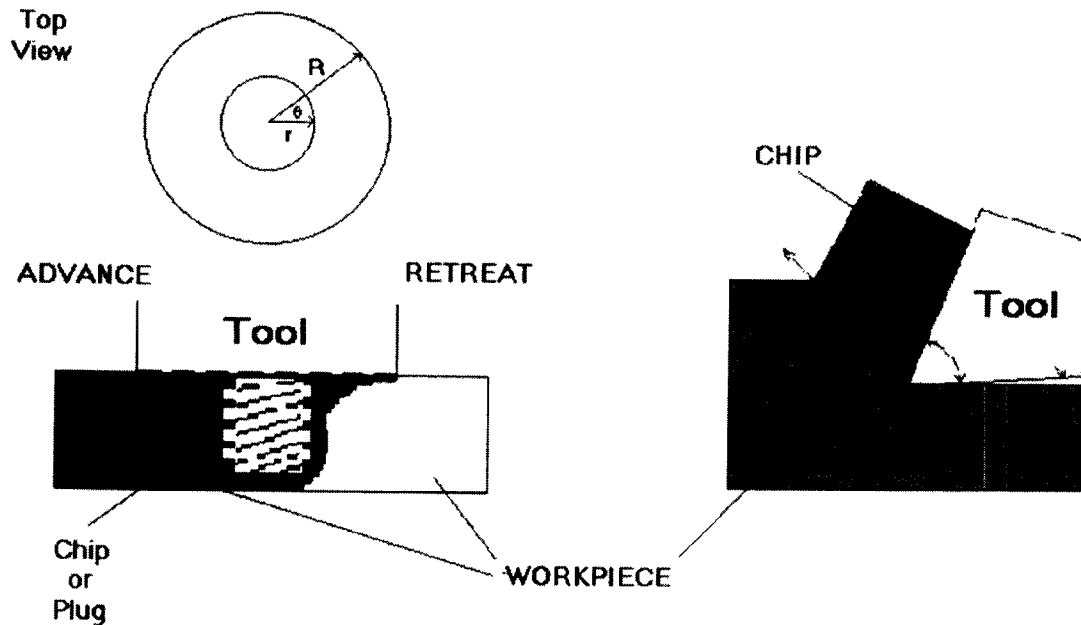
Schematic illustrating the similarities between friction stir welding (left) and metal cutting operations (right). The friction stir welding transverse section (left) shows base plates (gray and white), weld tool (shoulder and threaded pin), and rotating plug (black area surrounding weld pin beneath shoulder).
